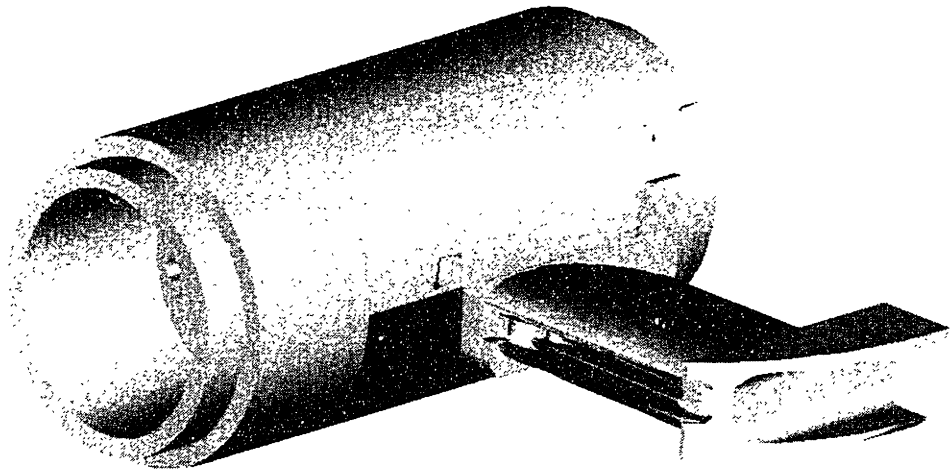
STOWED WING PIVOTED OUT OF WING MODULE
